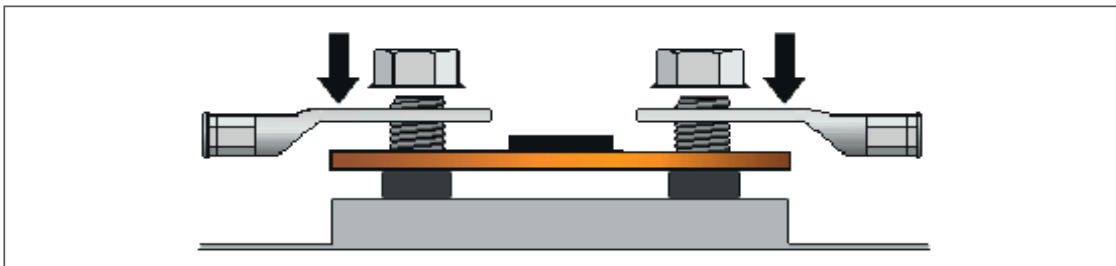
HV SBM_I evo, mounting the ring terminals of the HV- power cables with the M8 nuts
